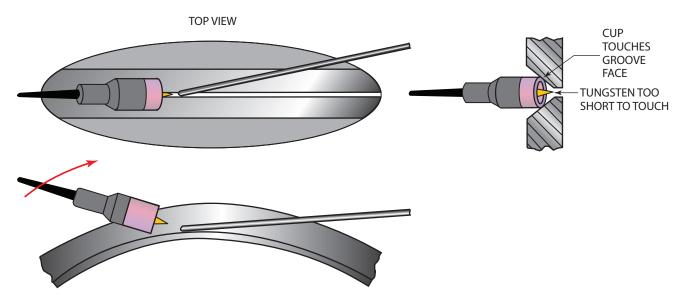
Supporting the torch and filler rod in the groove will help when making the tack welds.
